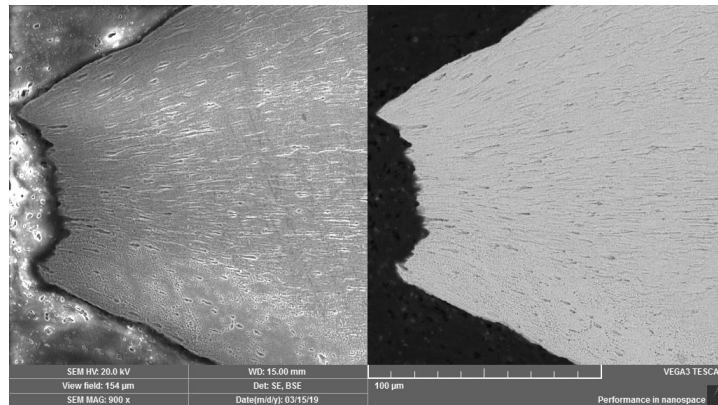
Fracture surface in the longitudinal section of the copper conductor wire - sample drawn through a bigger number of dies
